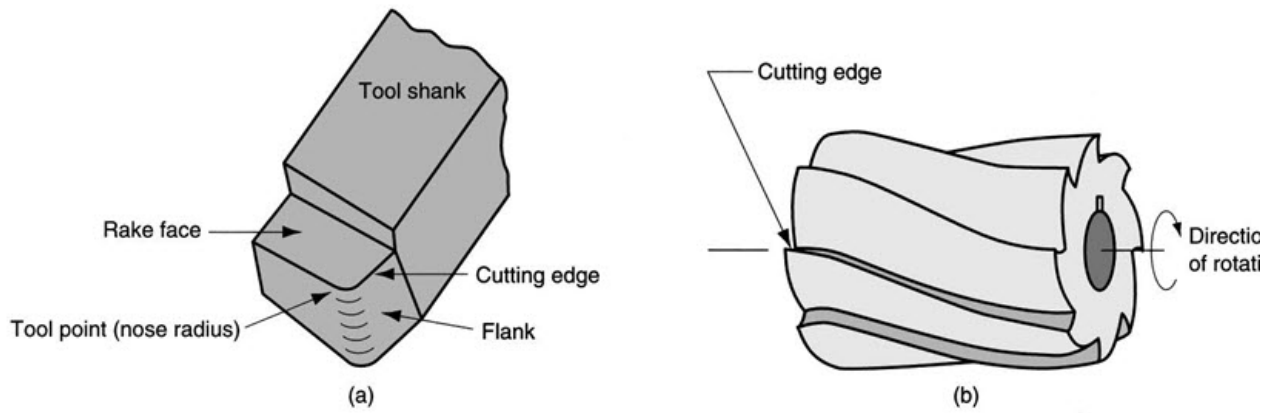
(a) A single-point tool showing rake face, flank, and tool point; and (b) a helical milling cutter, representative of tools with multiple cutting edges
